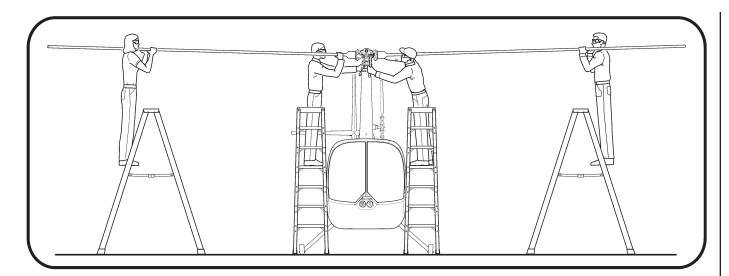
SUPPORTING MAIN ROTOR BLADES DURING BLADE REMOVAL OR INSTALLATION
